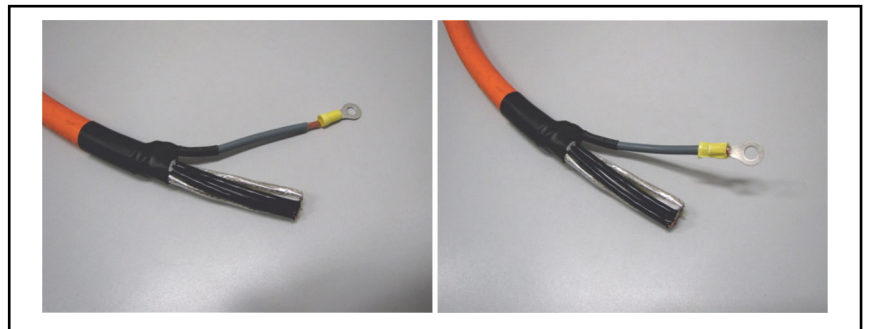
Cut shield extension in a suitable way and assemble the ring terminal
